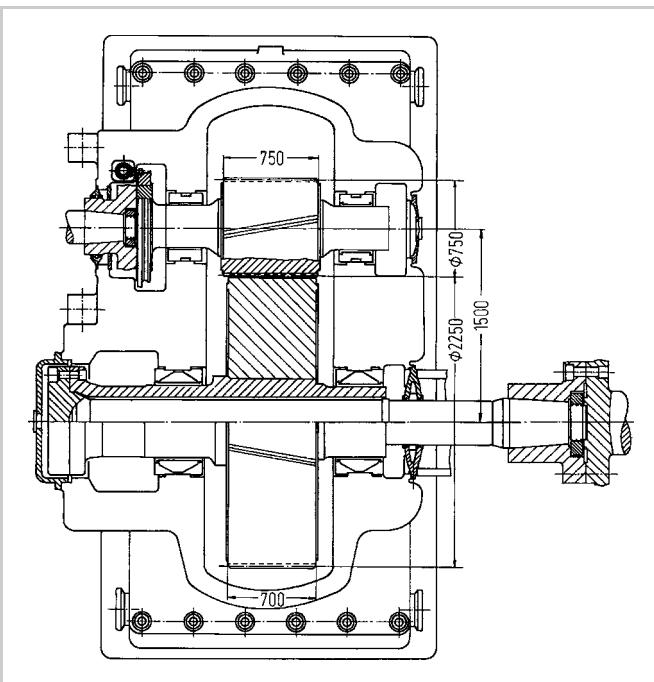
Large gearbox with an output torsion shaft; the bearing forces are transmitted over a stiff hollow shaft; the inner torsion shaft is radially and torsionally flexible, after [7.203] (Siemens-Maag)
